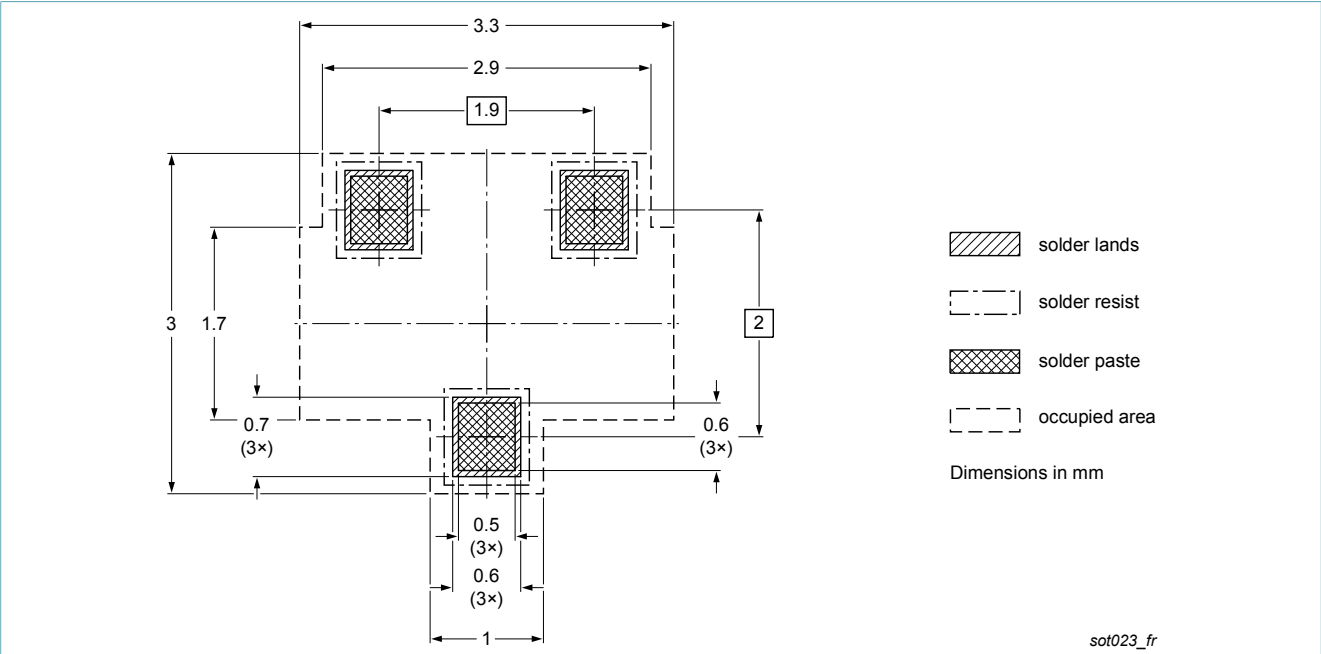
Reflow soldering footprint for TO-236AB (SOT23)
